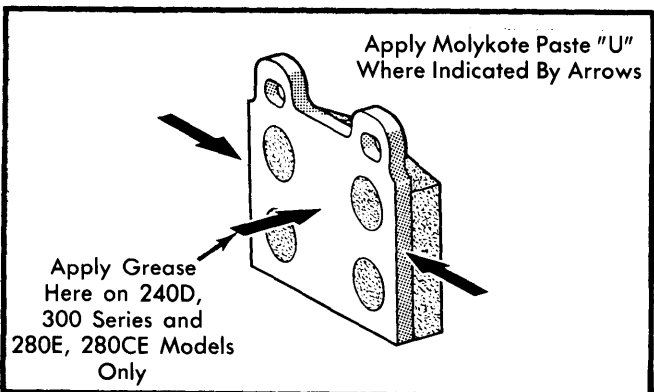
Typical Mercedes-Benz Disc Brake Pad Illustration Shows Molykote Application Points
